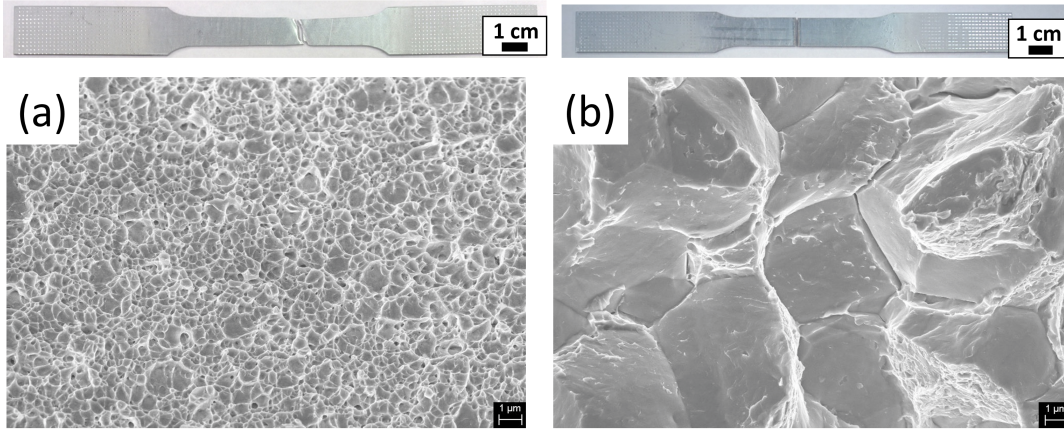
SEM micrographs of the fracture surfaces of (a) BM and (b) laser welded MMn steel
